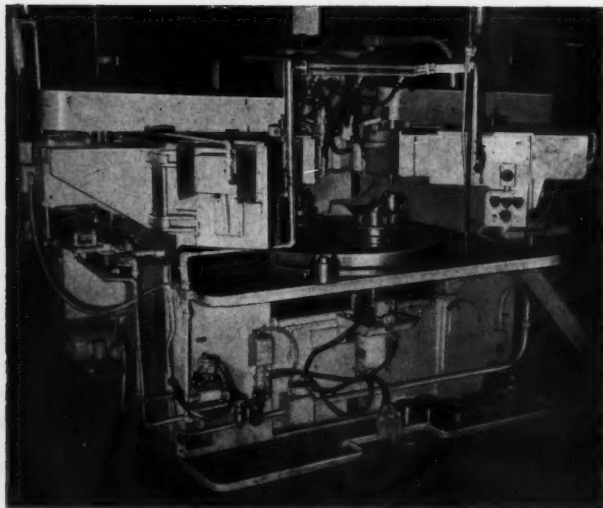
The thrust surfaces at the bottoms of the recesses milled on the Archdale machine are faced during an automatic cycle on this Hoern & Dilts machine, which also faces the tops of the lugs
